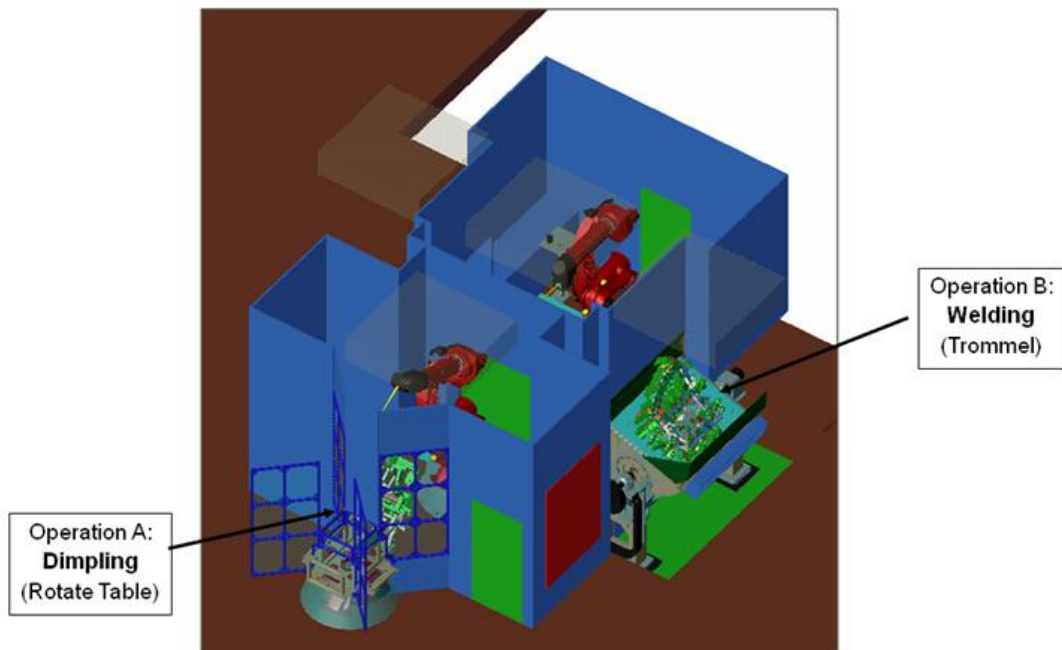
Laser Dimples and Laser Welding Process
